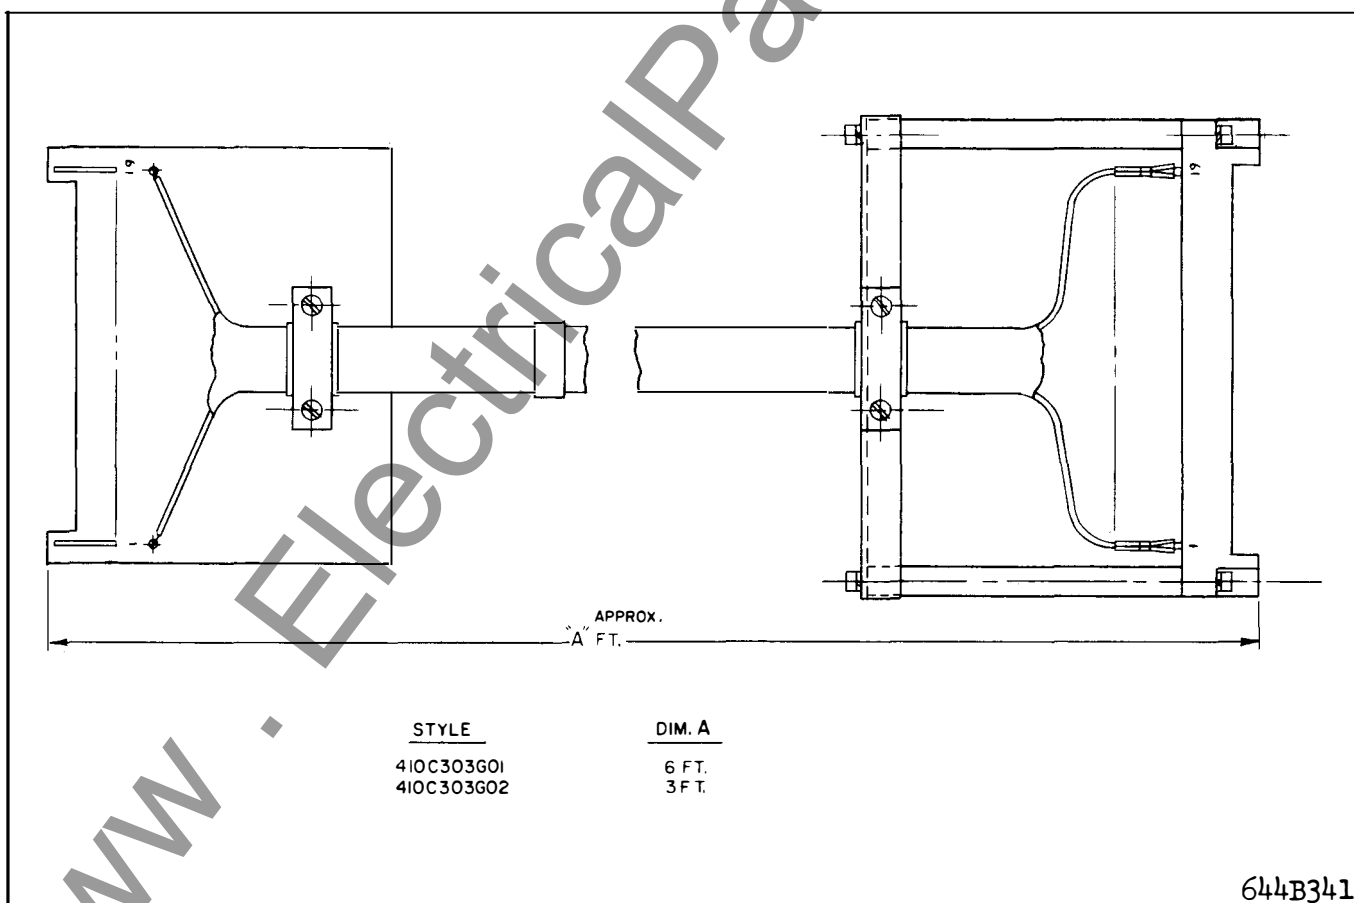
19 Terminal Printed Circuit Board Test Harness Outline.
